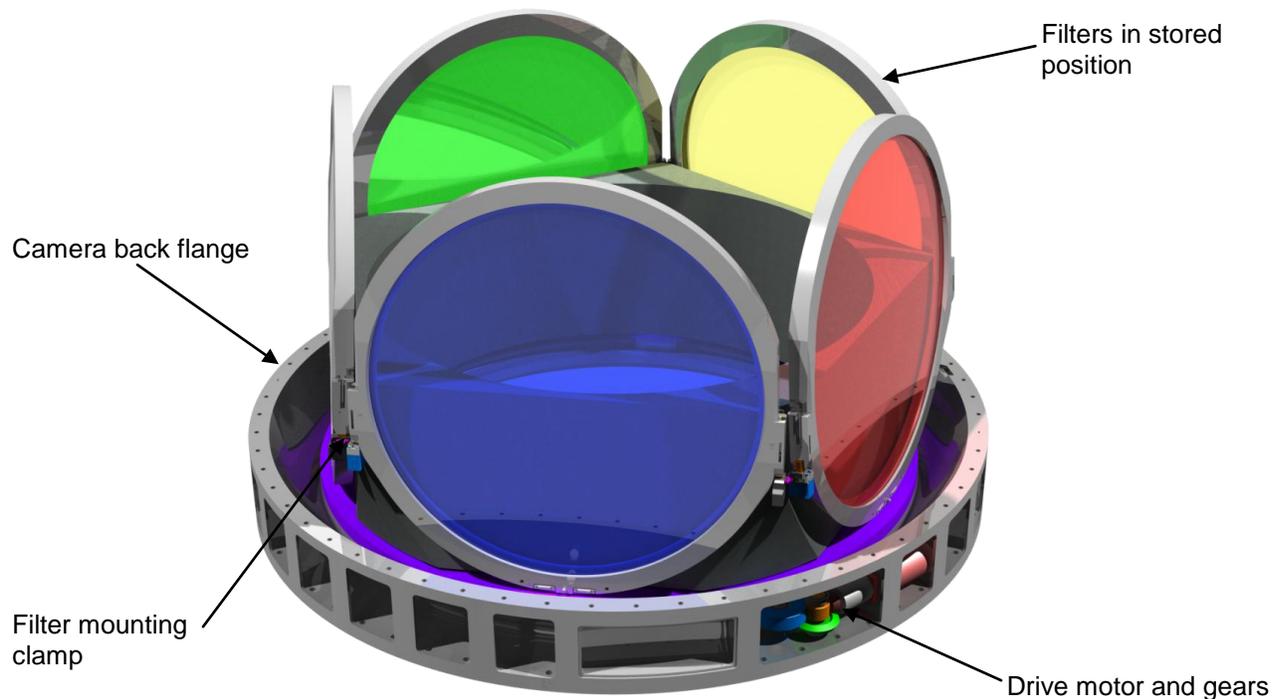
Filter Storage Carousel Mounted to Camera Back Flange
